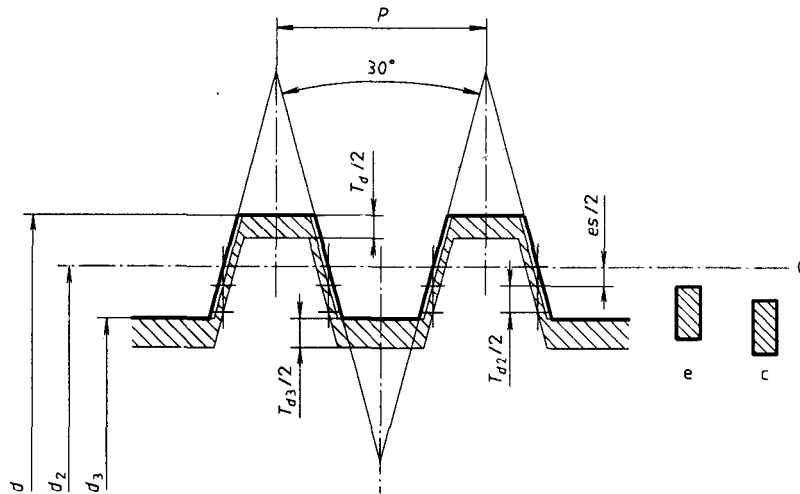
Bolt threads with tolerance positions c and e for the pitch diameter
